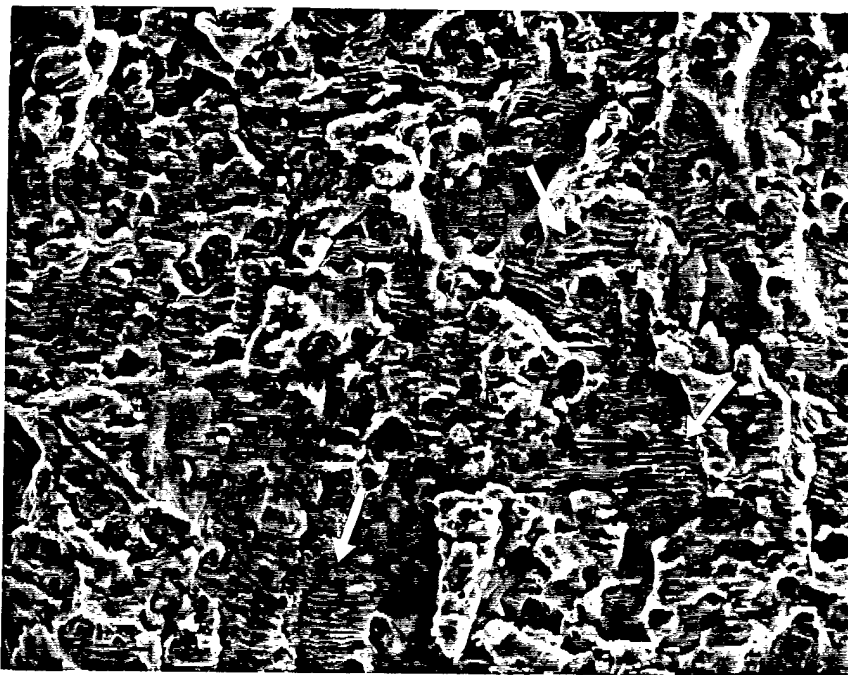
Typical Striations on the Fracture Surface of SIK Rod -00938 (Mag. 1kx).
